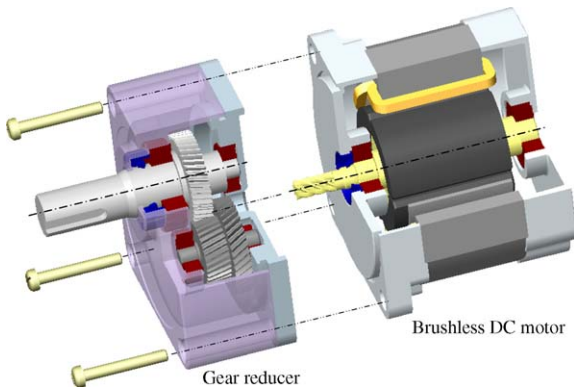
Conventional design of a BLDC motor connected with a gear reducer.
